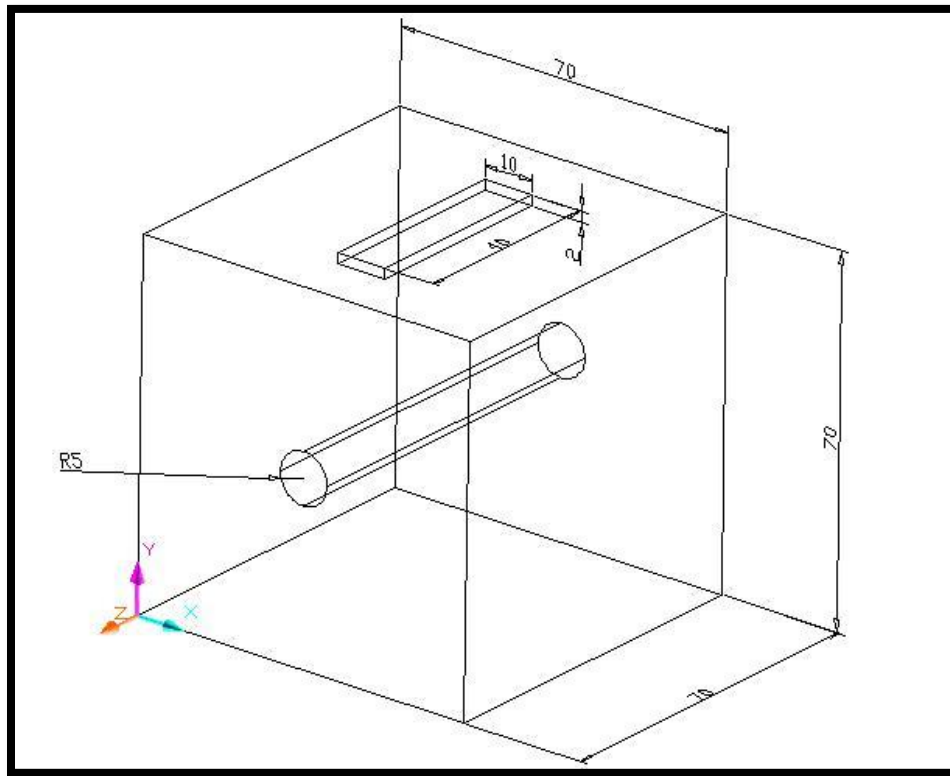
3D view for Dimension of circular shape cross-sectional cooling channels
